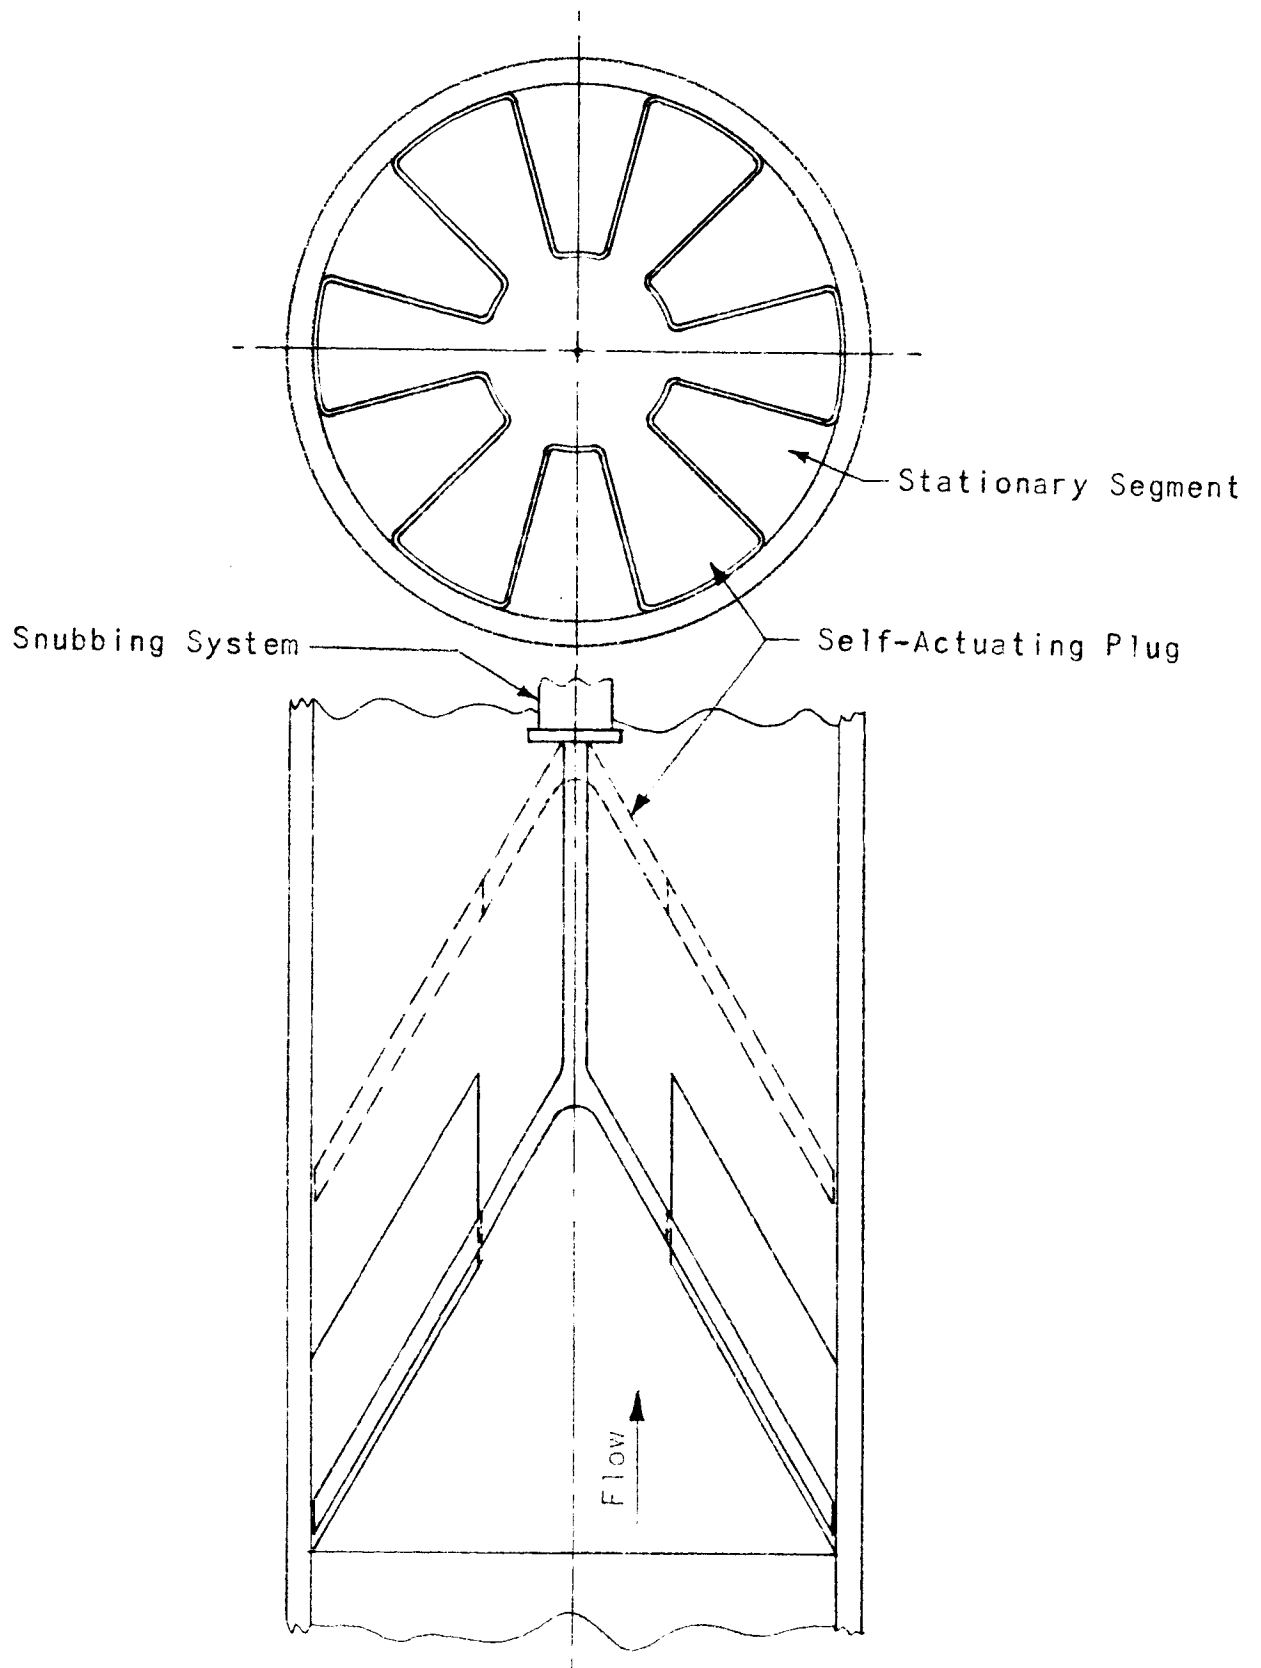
SKETCH OF PLUG VALVE CONCEPT
